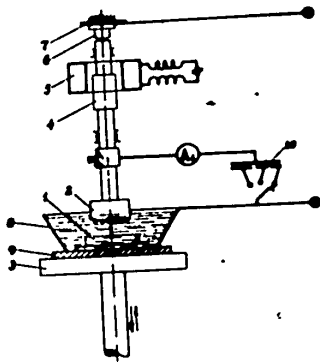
"Drilling Machine" using the Spark Method. The workpiece (1) is immersed in a vessel (8) with fluid and connected to the plus pole. (9) is an insulating plate. The tool (2) is set in a holder (4) and can be vibrated by the solenoid (5), opening and closing the circuit.
